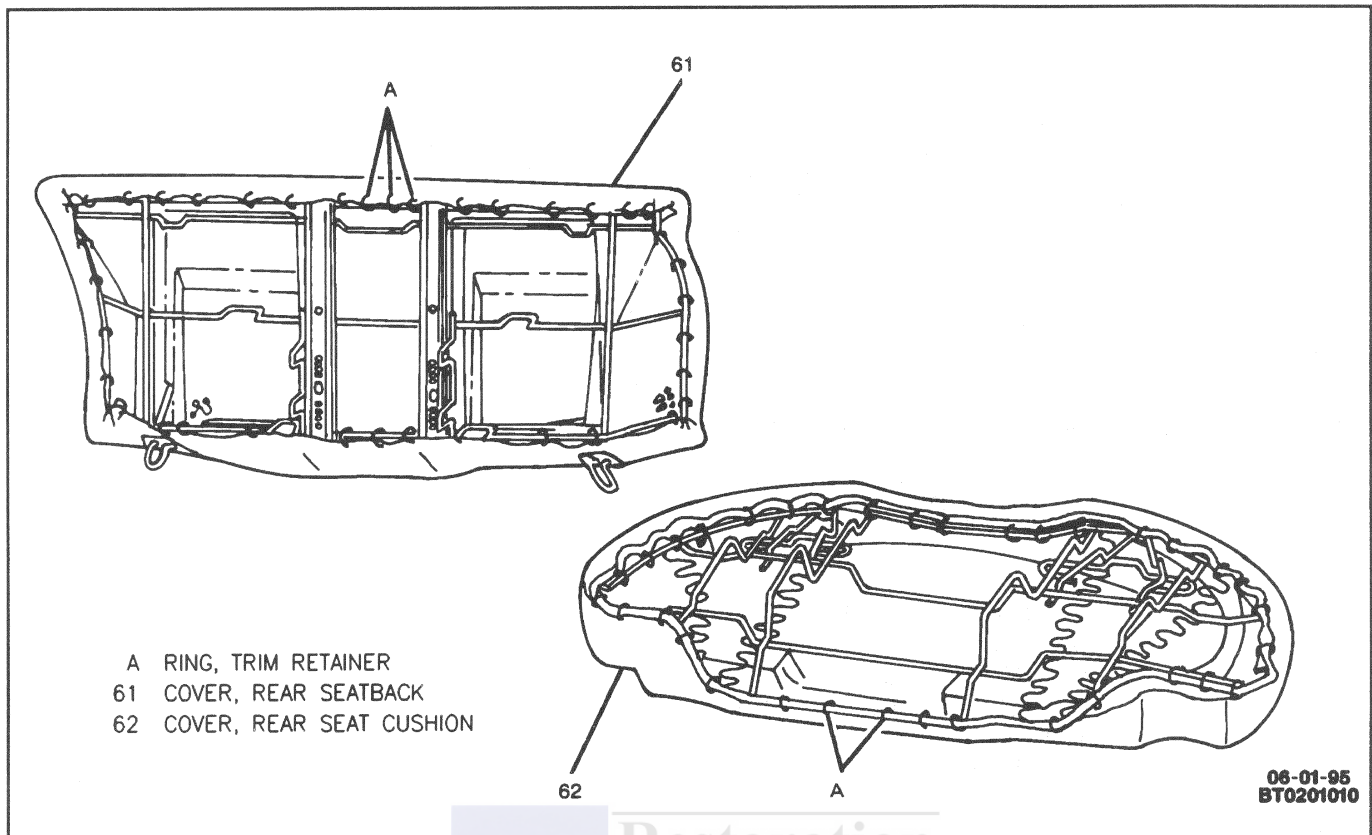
Installing Rear Seat Cushion and Seatback Covers (Sedan)
